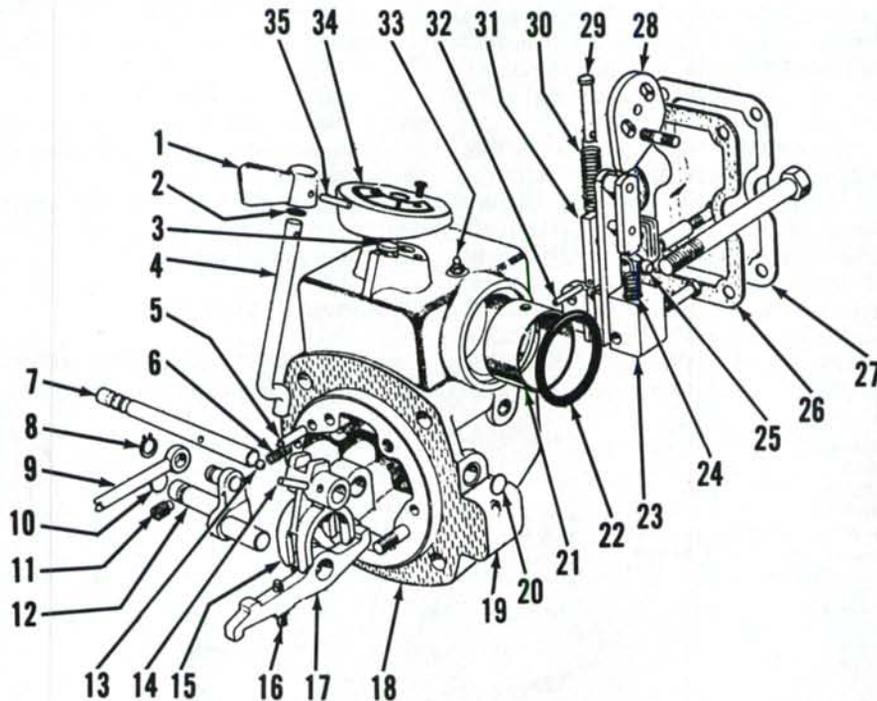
Exploded view of selector dial mechanism and control used on some models.
